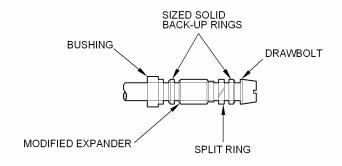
Harrison Fitting - Installation (sheet 1/3)
